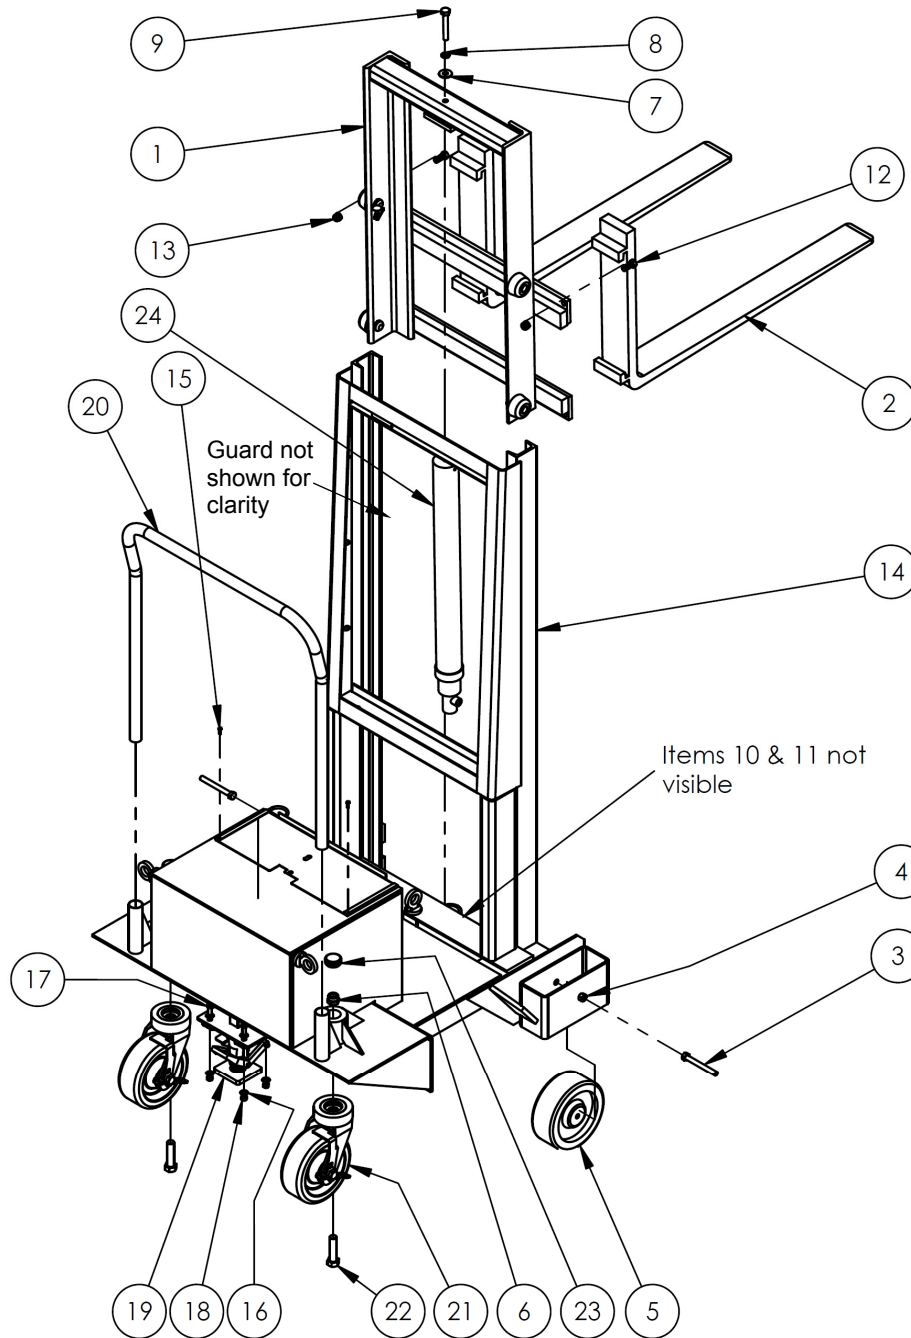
CB-PMPS-6-50 Exploded Parts Diagram and Bill of Materials
